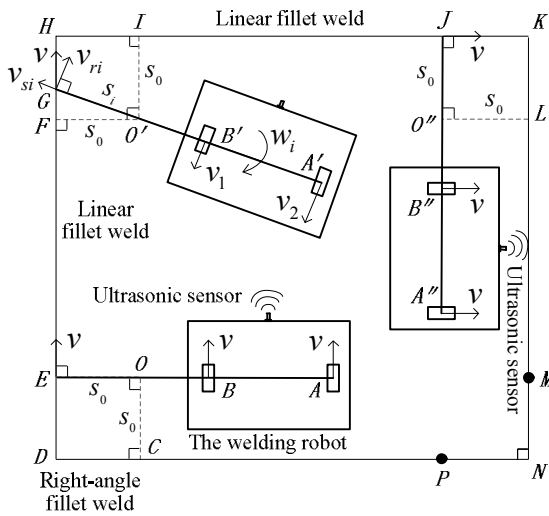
Implementation of the rectangular fillet weld tracking
